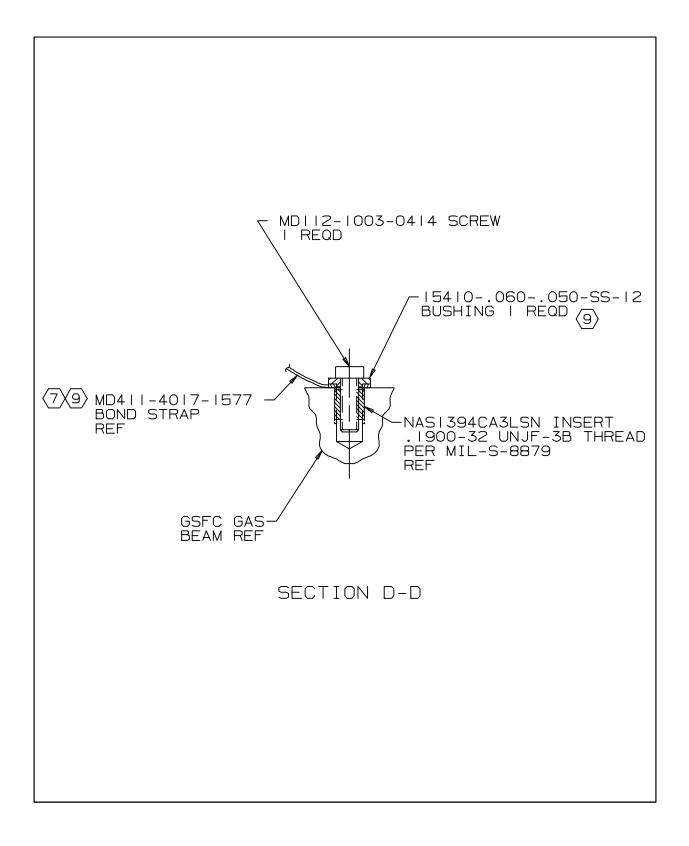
SHUTTLE ORBITER/HH ADAPTER BEAM MOUNTING PROVISIONS (SHEET 3 OF 7)
